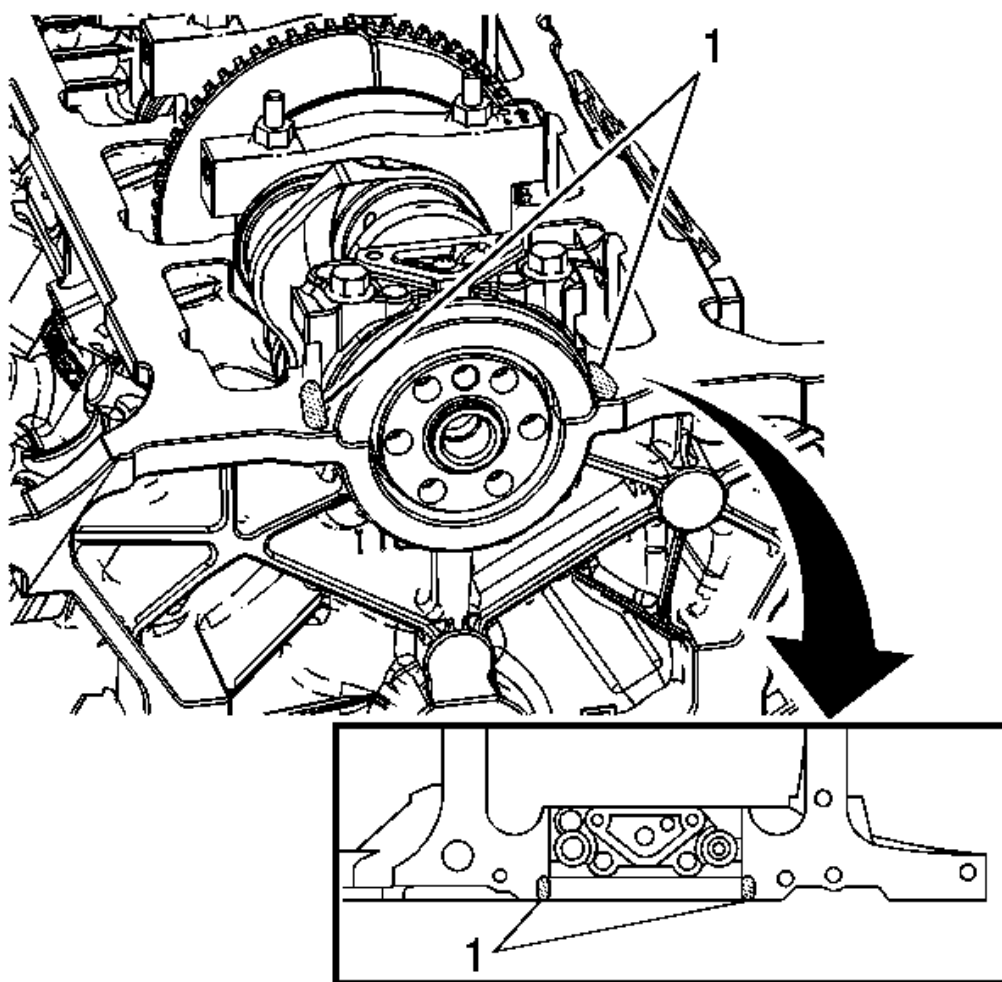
Identifying Crankshaft Rear Main Bearing Cap
